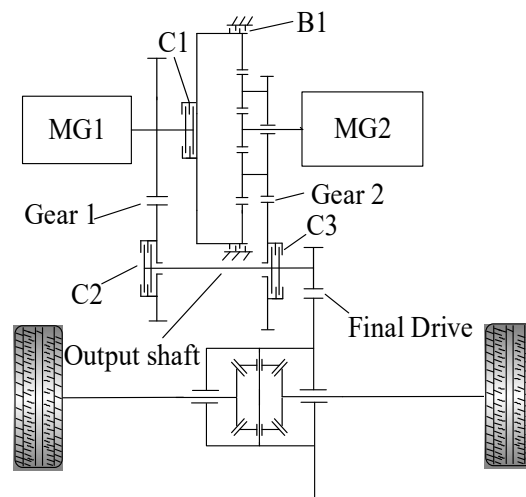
Electric drive system configuration. The system consists of two drive motors (MG1 and MG2), one planetary gear, three clutches (C1, C2, and C3), one brake (B1), two gear pairs (Gear 1 and Gear 2), and one main reducer (Final Drive).
